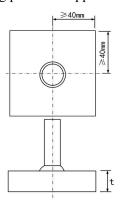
Test assemblies of stud welding procedure approval
